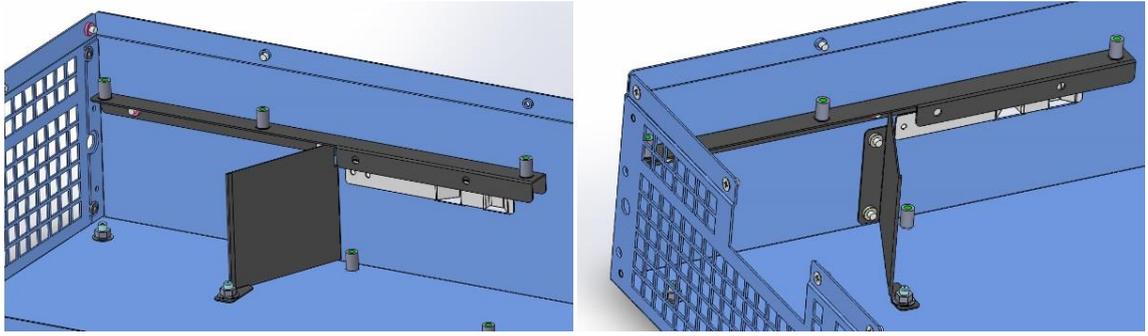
L-profile bracket and air guide inside 93PS power module, all electronics removed from 3D model for better view.
